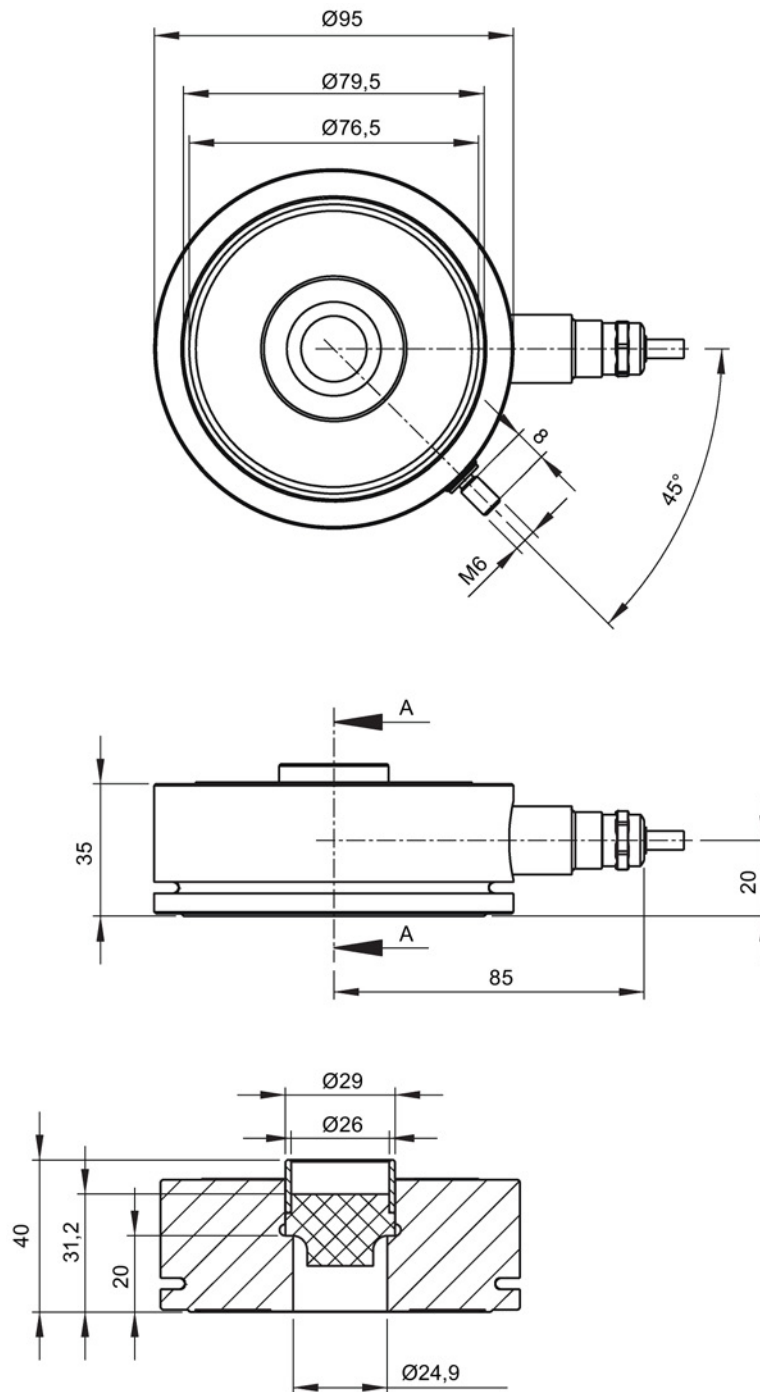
Dimension drawing for SIWAREX WL280 RN-S SA, rated load 13 t
